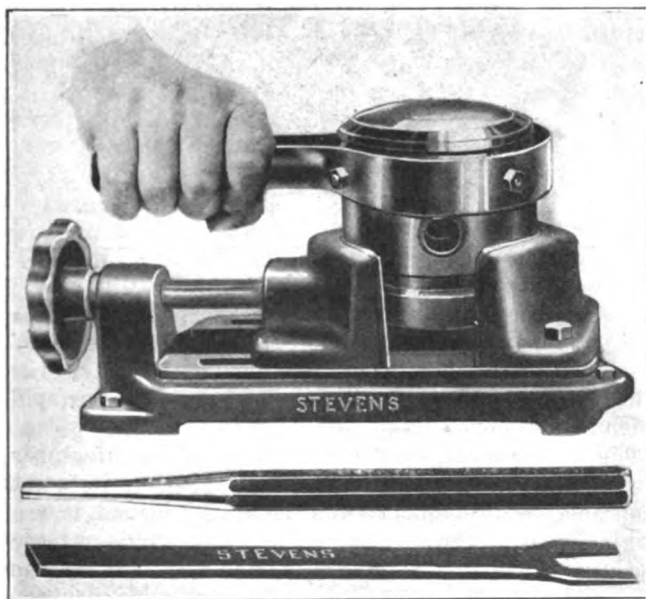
STEVENS "SPEED UP" PISTON VISE, GROOVE CLEANER, PUNCH AND PRONGS
